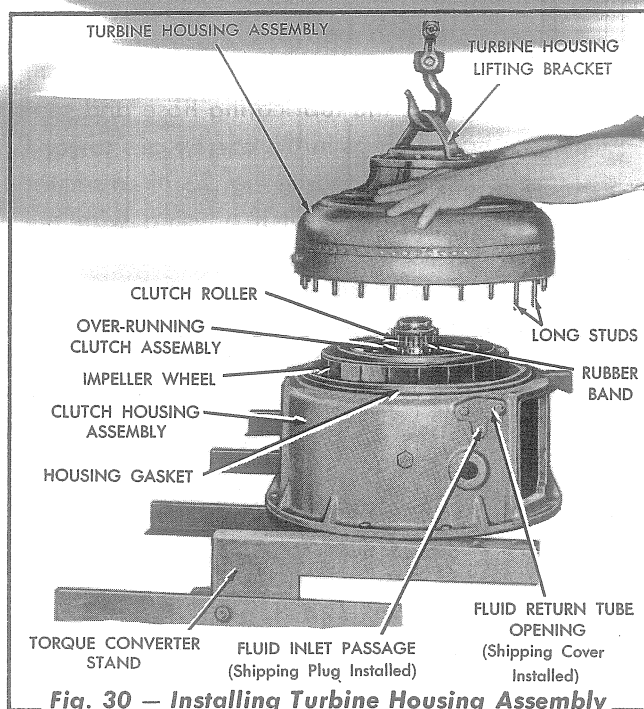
Installing Turbine Housing Assembly Onto Clutch Housing Assembly
